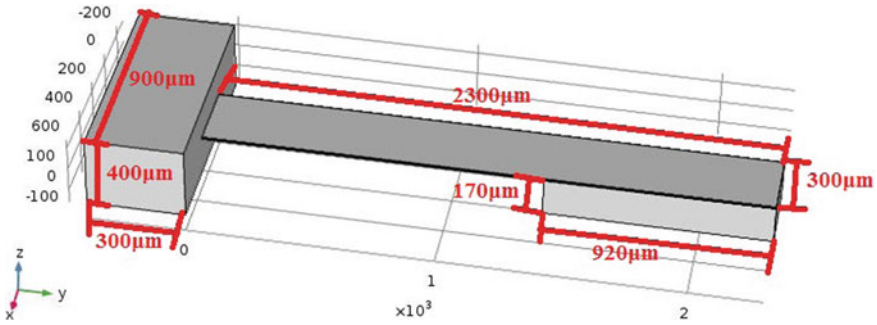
Dimensional view of the designed straight T-shaped cantilever beam
